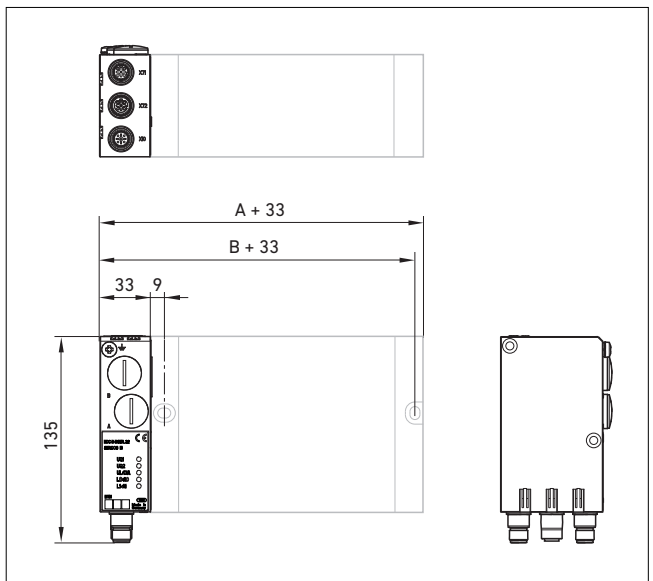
Dimensioned drawing for the valve system (bus coupler and valves)
